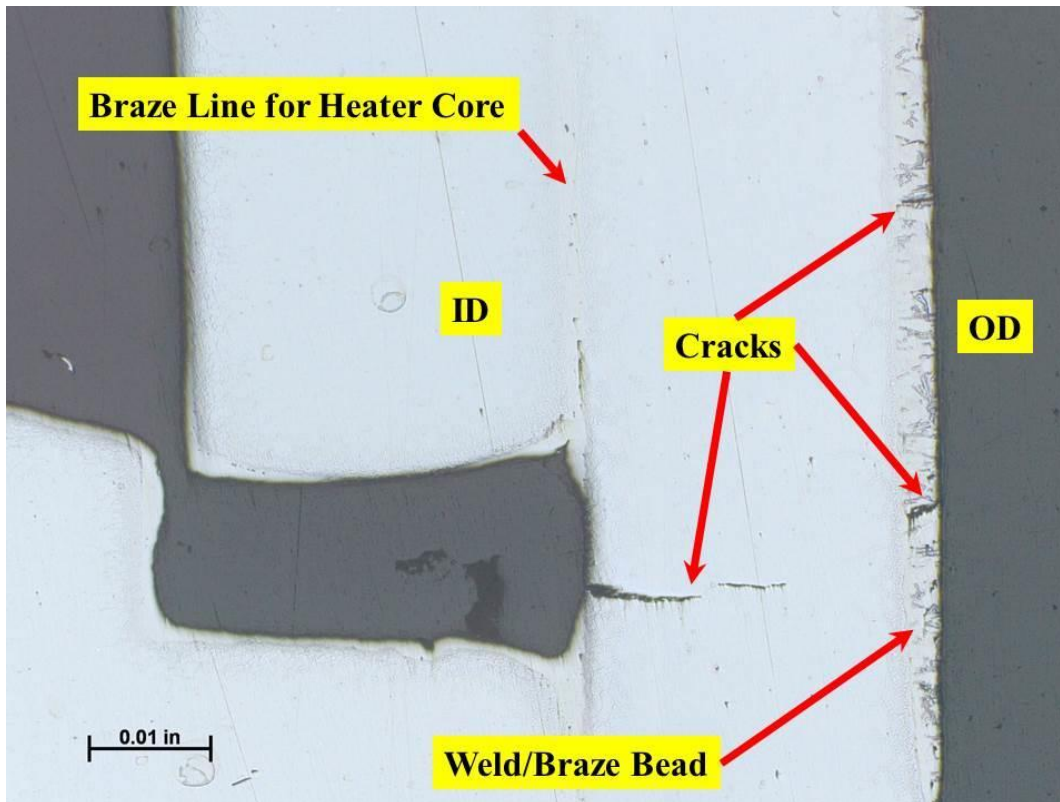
NON THROUGH-WALL CRACK (②) LOCATION SHOWS ID AND OD CRACKING (UNETCHED)
